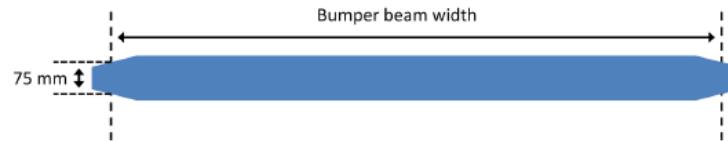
Measuring Bumper Width within 75 mm Vertical Engagement – Front View
